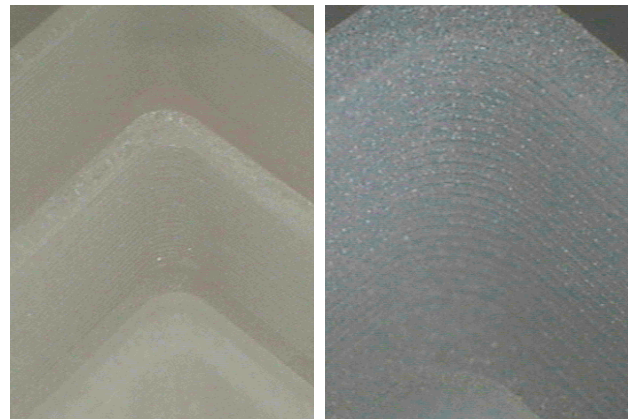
Layer shape of Shoe RP Master with Up Flat parameter
